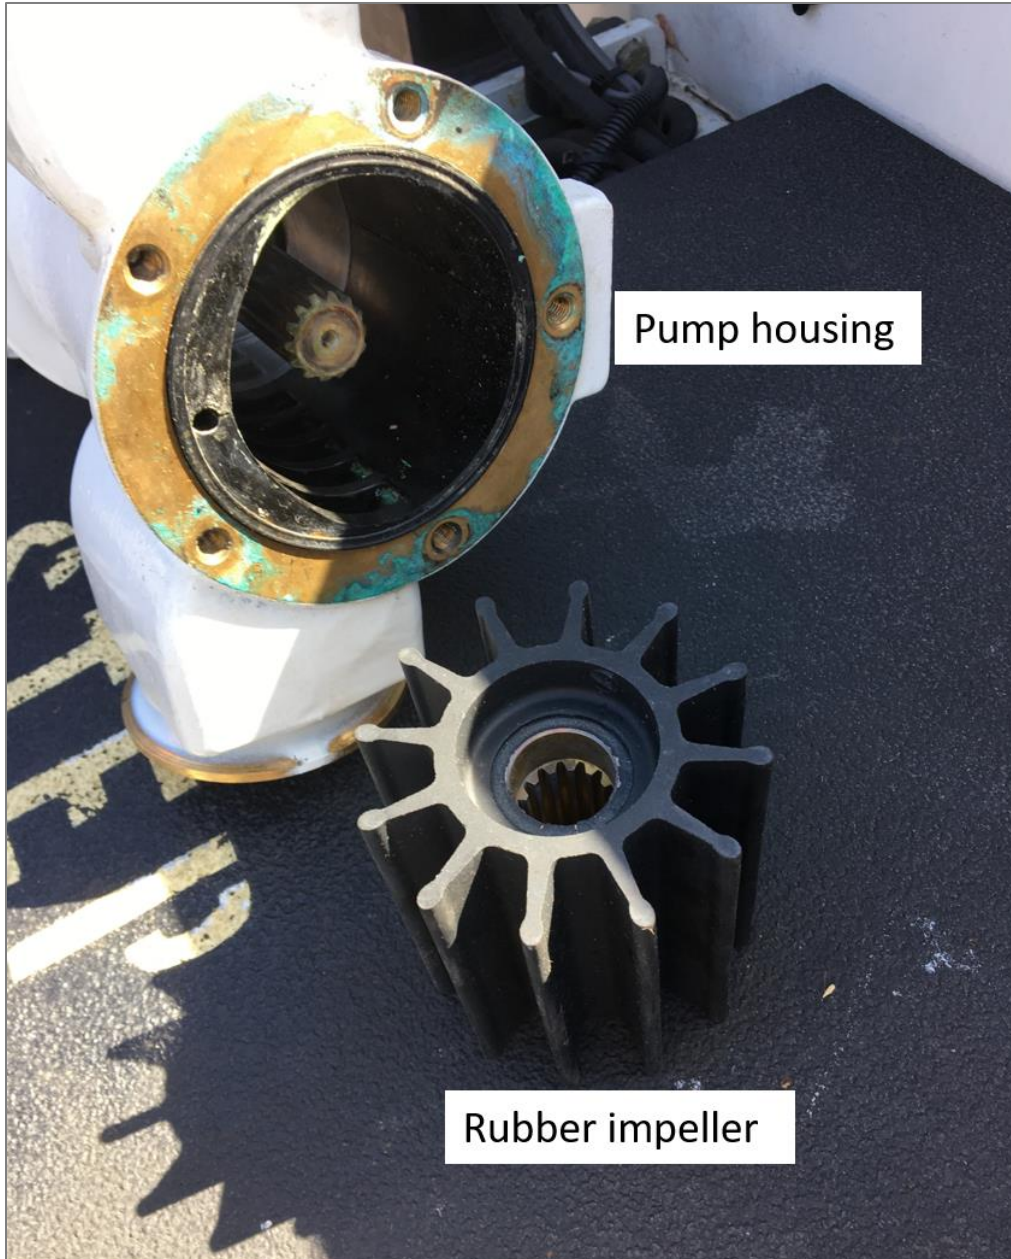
Upper left: Housing for raw-water pump. Center: New rubber impeller.
